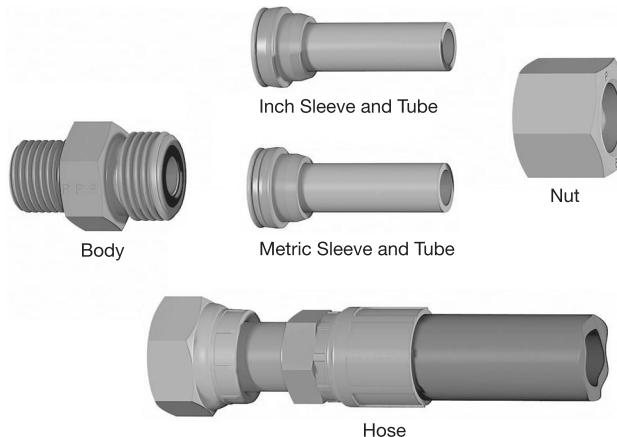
Seal-Lok Works with Inch or Metric Tube and Hose
